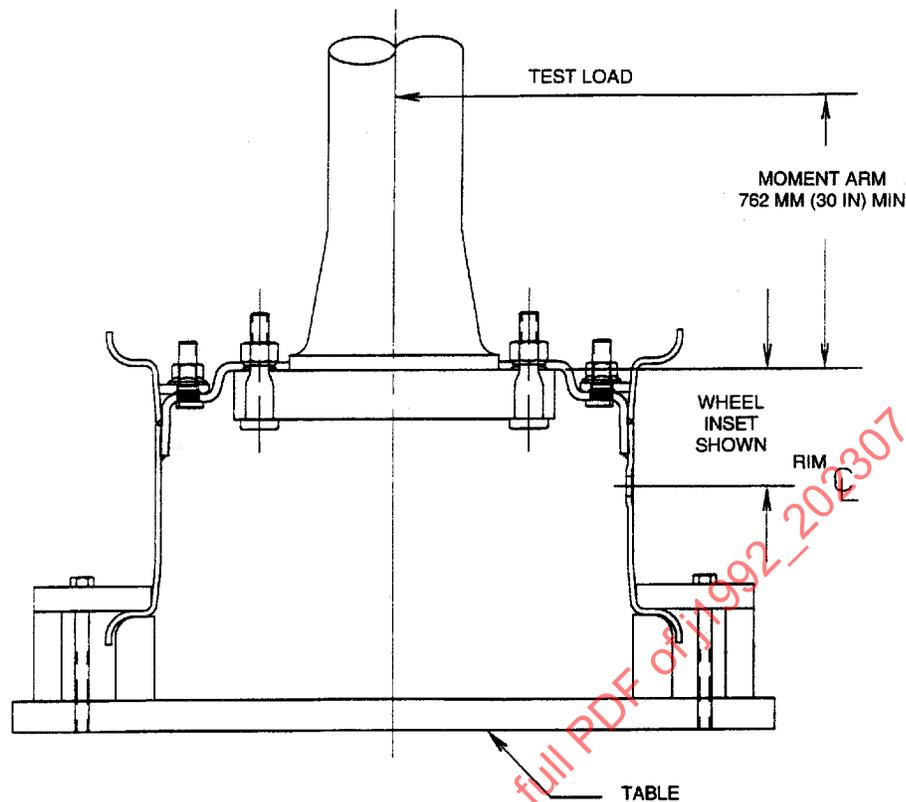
B - Cornering fatigue test for bolt-together divided wheels (typical setup)
